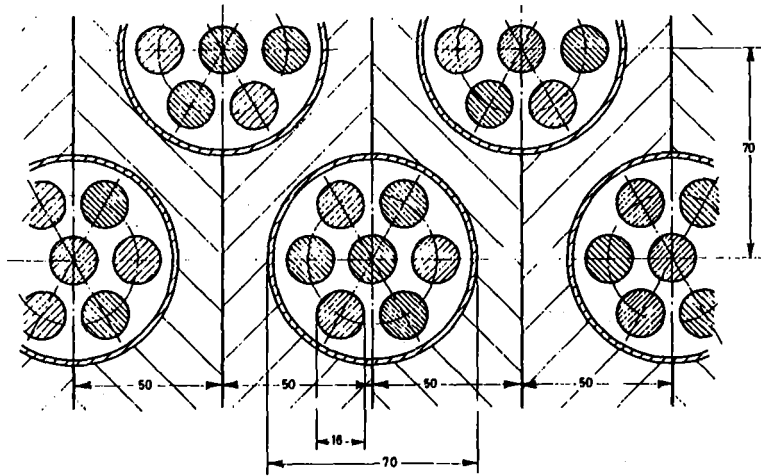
Water Cooled Boron Carbide Rod Bundles
